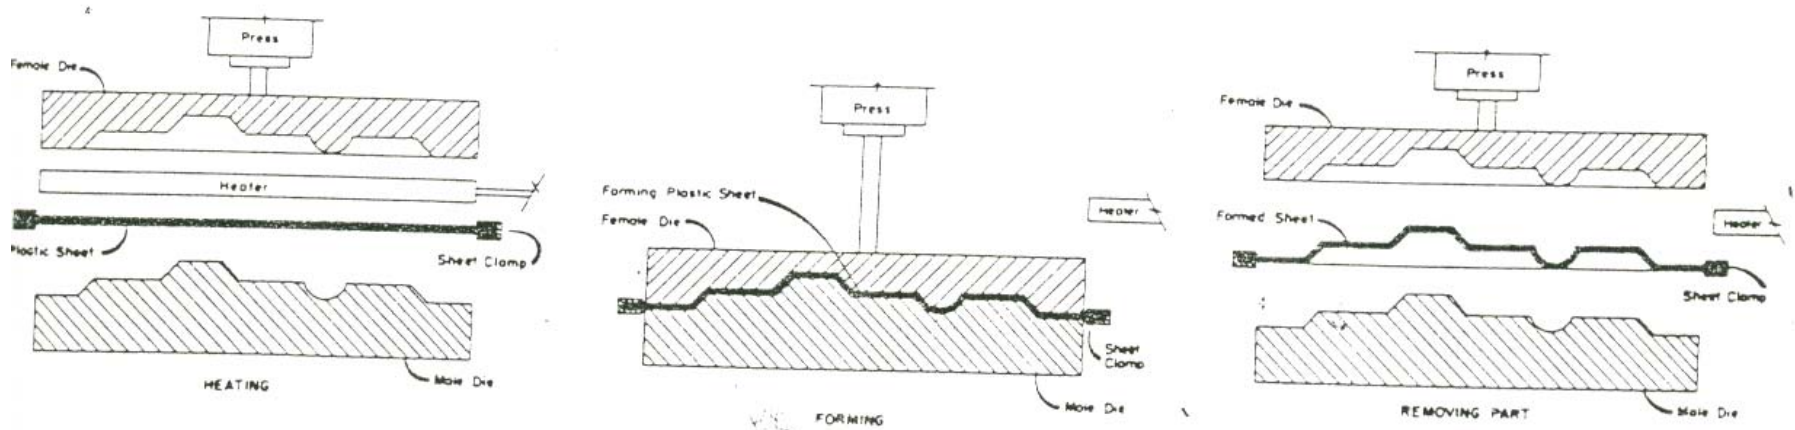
Matched mold forming. (Courtesy Dow)
